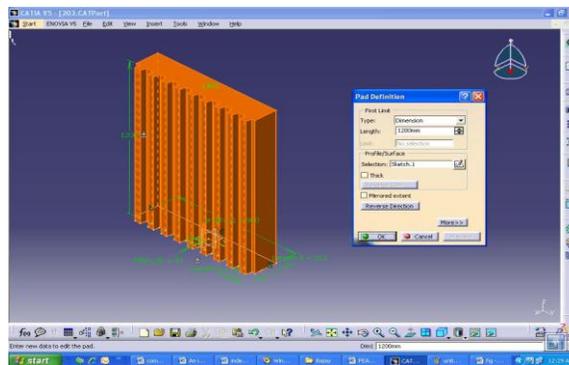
Extruding Sketch of Swing Jaw Plates Using Pad Tool
